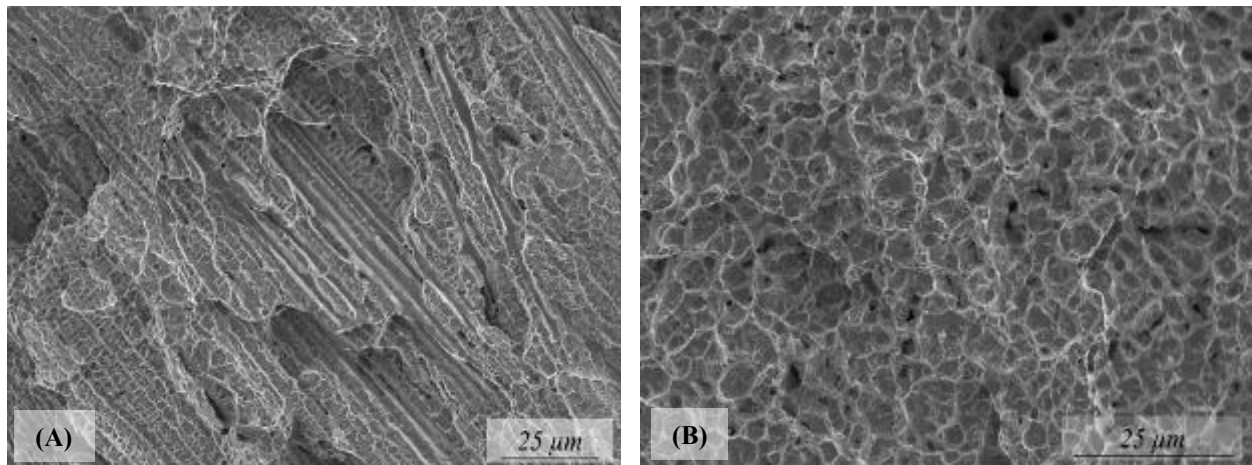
SEM images of fracture surfaces of failed EBM as-fabricated specimens. (A) Shows the fracture surface of SLM X orientation and (B) of Z orientation
